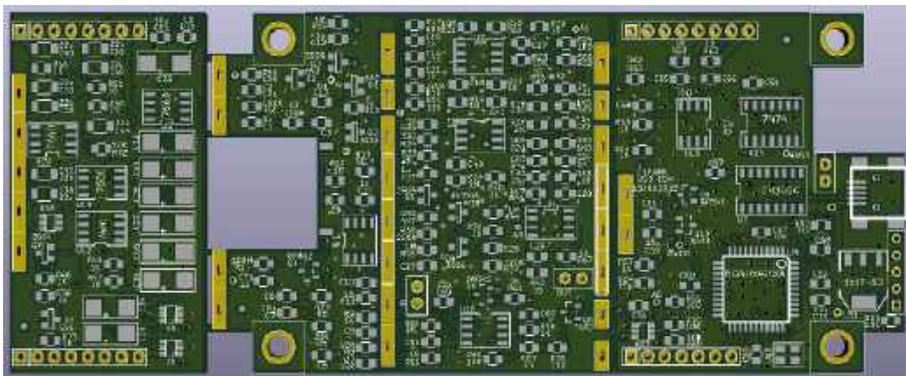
The 4 layer PCB of the gamma spectrometer with an integrated 1K MCA. The power supply module shown on the left side will be stacked above the MCA section during assembly.
